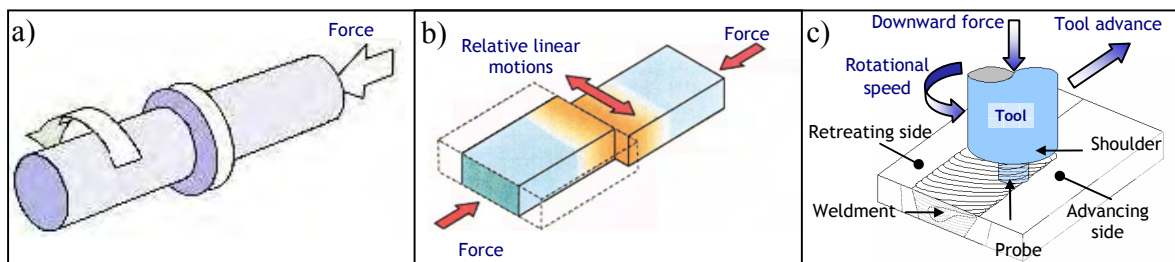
Friction welding processes: a) Rotary Friction Welding, b) Linear Friction Welding, c) Friction Stir Welding.
